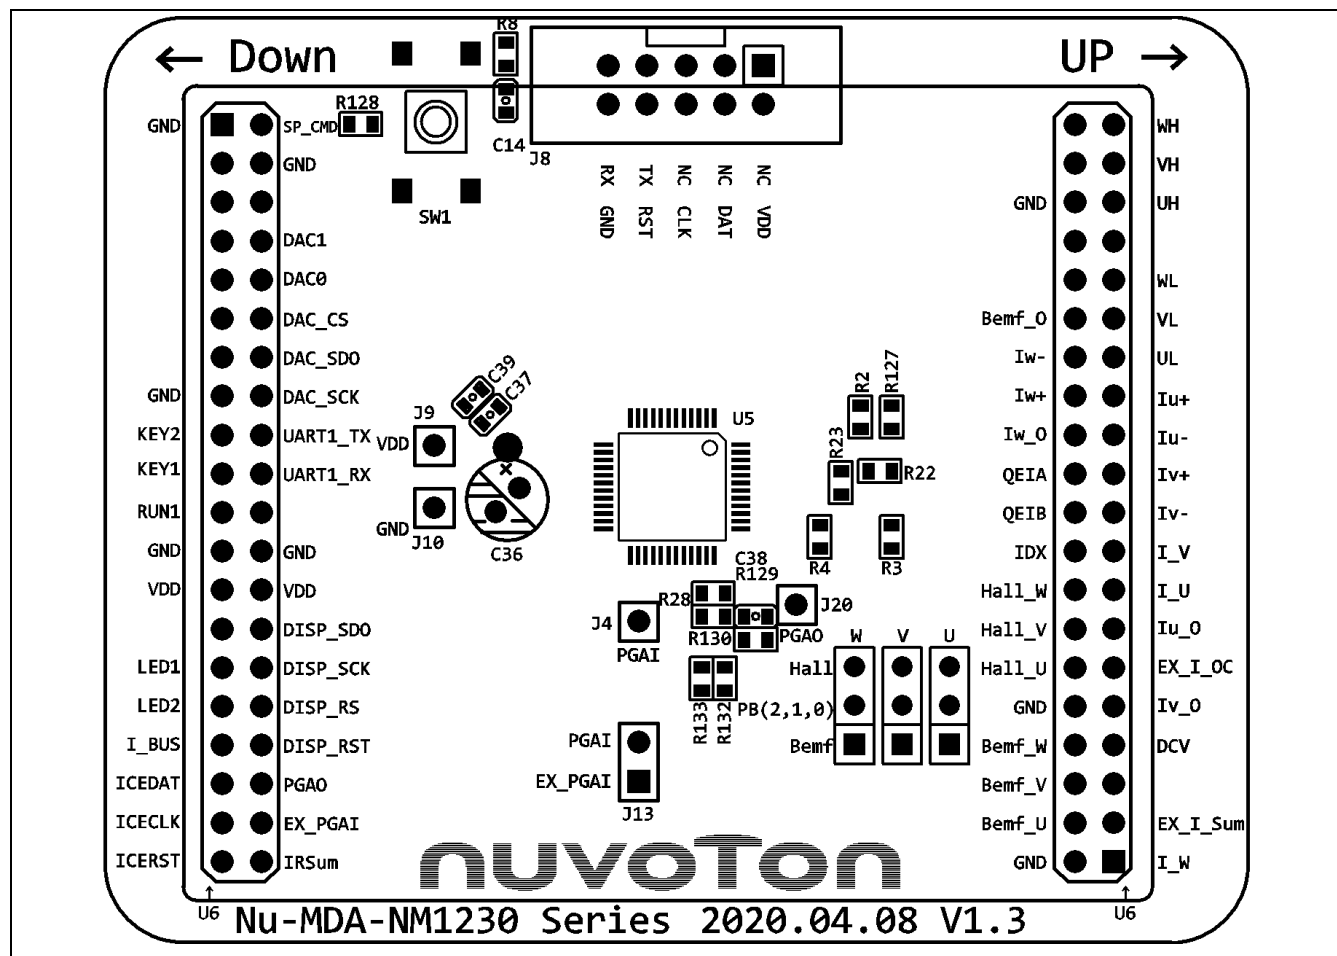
Nu-MDA-NM1230 PCB Placement
